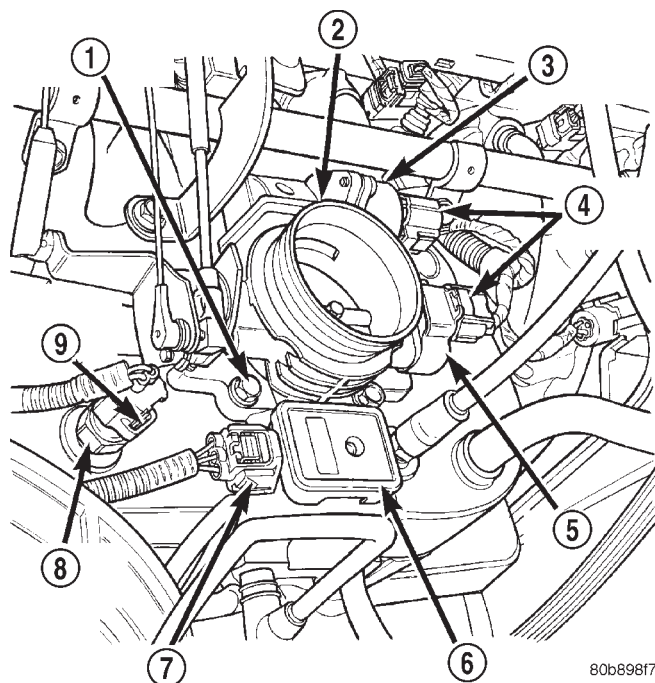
Throttle Body and Sensor Locations—4.0L Engine
